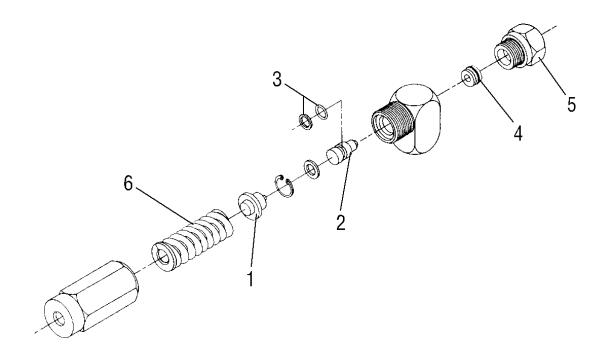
Hydra Hoe Wand Assembly C2660, Rev -
